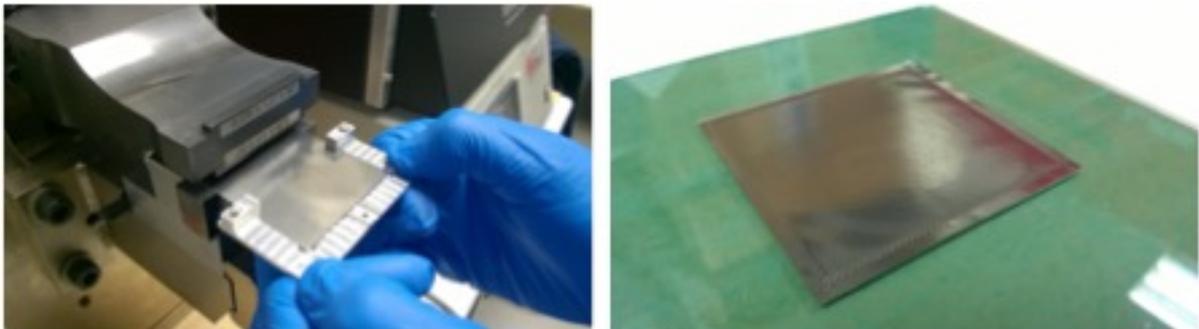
Ultrasonic welding of Gd foil to Aluminium support frame.
